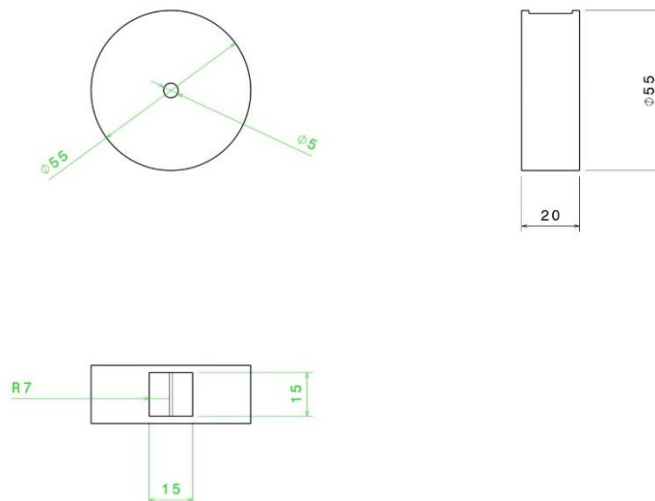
Isometric Drafted Views of Hopper Wheel
